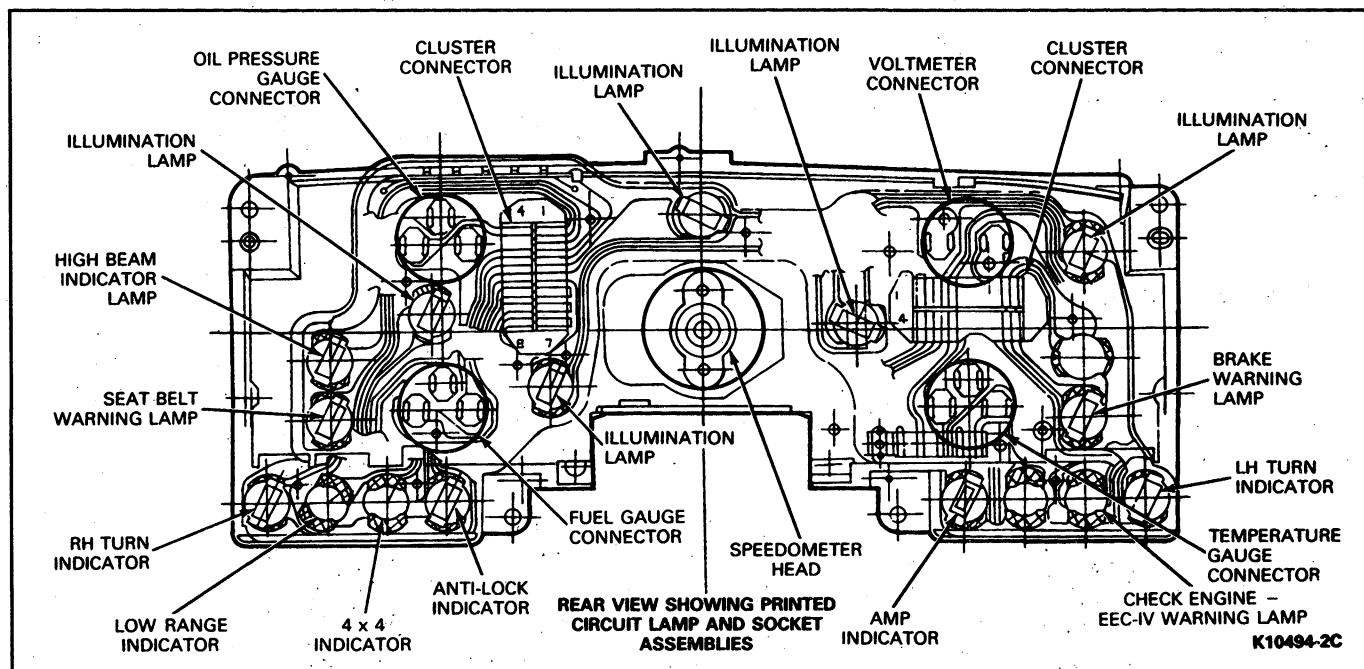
Instrument Cluster Rear View—F-150—F-350, F-Super Duty and Bronco (Without Tachometer)
